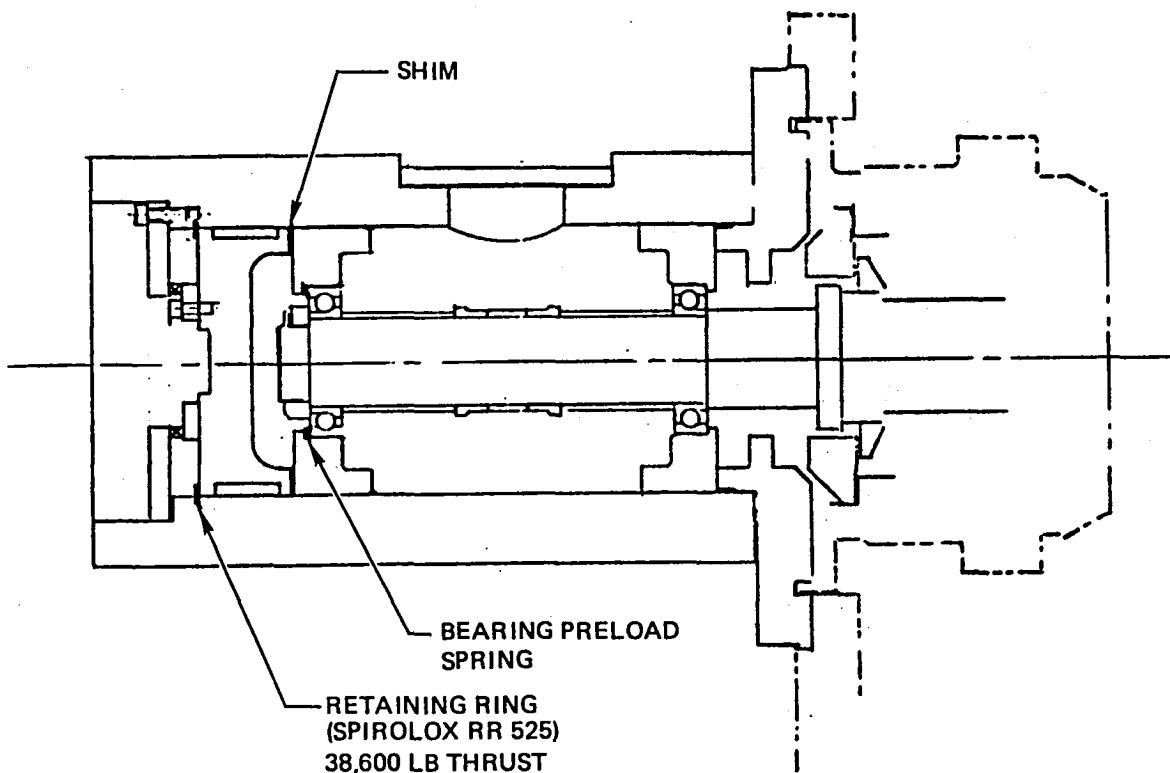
Tester Modification to Replace Bearing Axial Load Piston With Preload Springs
